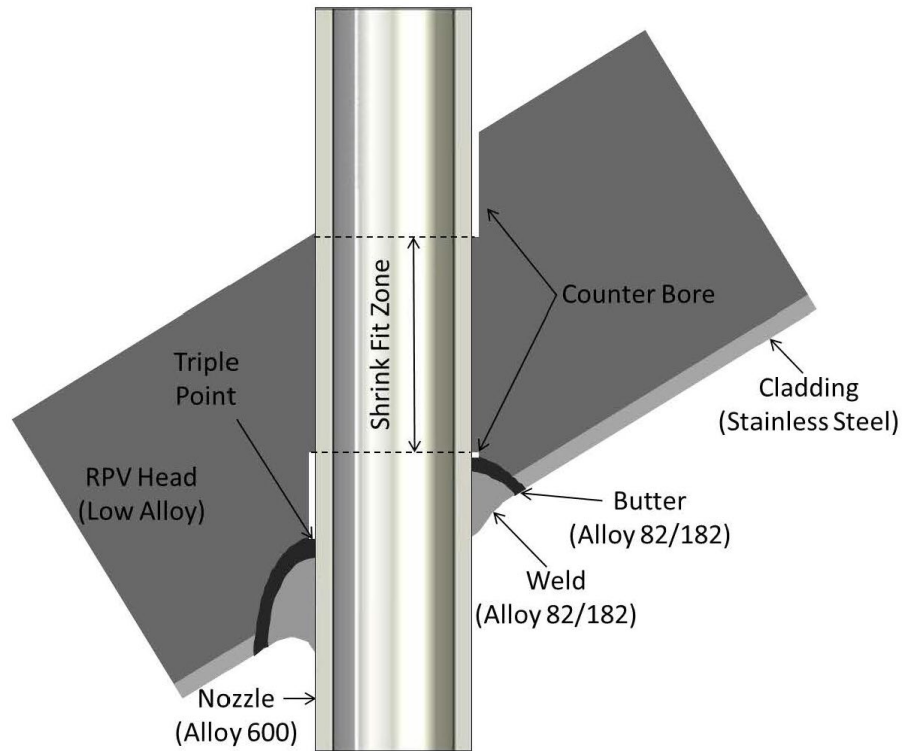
Upper Head Penetration with J-Groove Weld
